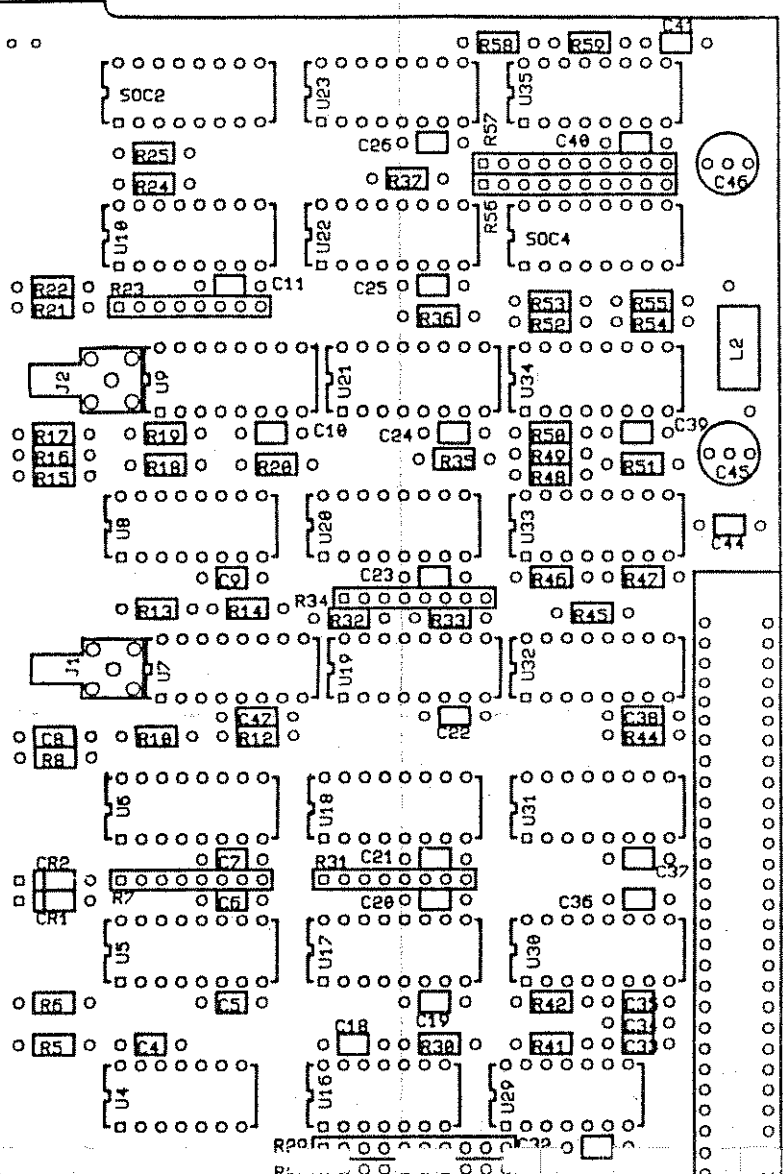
A14 Gate Board Assembly Component Locator/Schematic Diagram (Sheet 3 of 4)
